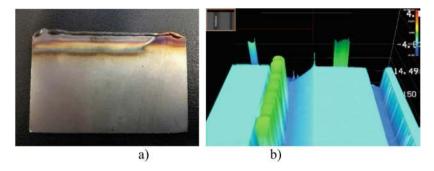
Robotic welding with AVC OFF (a) Flat SS plate, (b) 3D image
